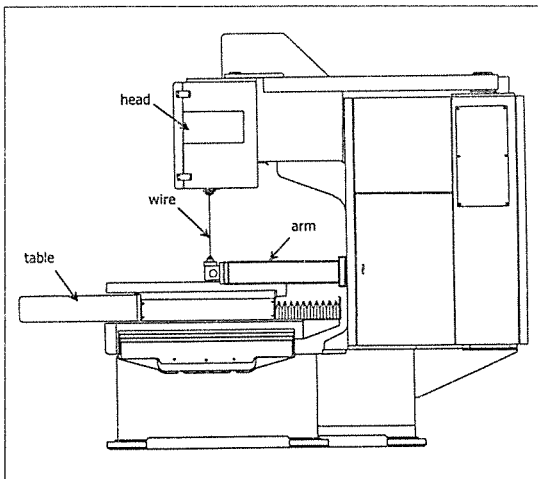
Schematic diagram of a typical electrical discharge wire cutting machine.
